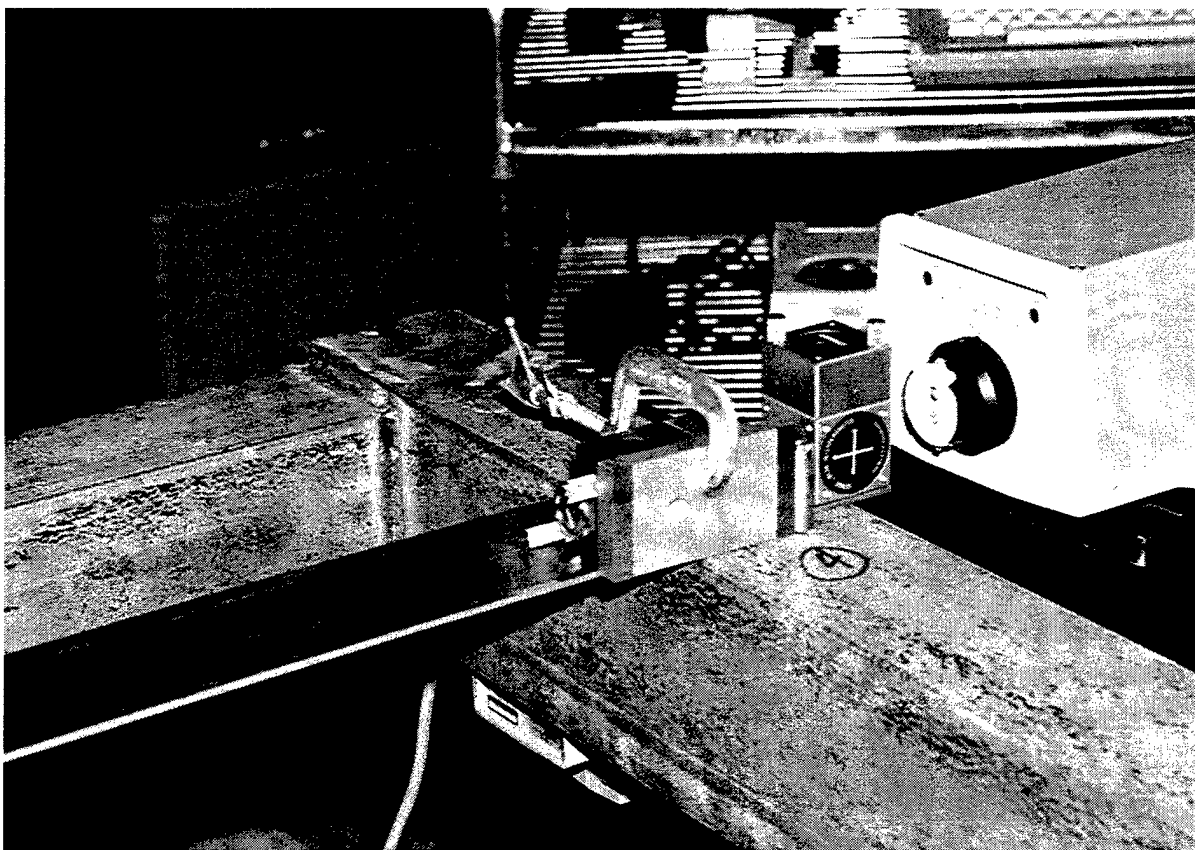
Distance measuring equipment being used to measure support bolt hole spacing on the upper support frame
